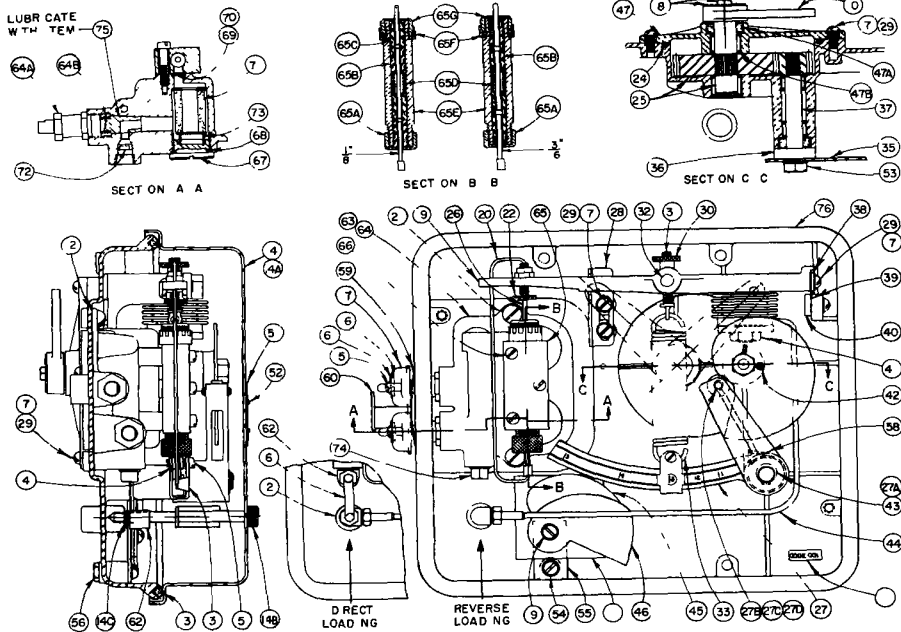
Parts Drawing P92-11, Positioner Assembly
